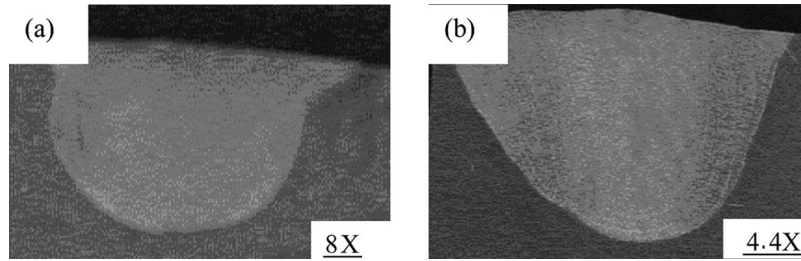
Actual cross sections of the 304LN stainless steel weld produced by A-TIG welding (a) Case I (b) Case II.
